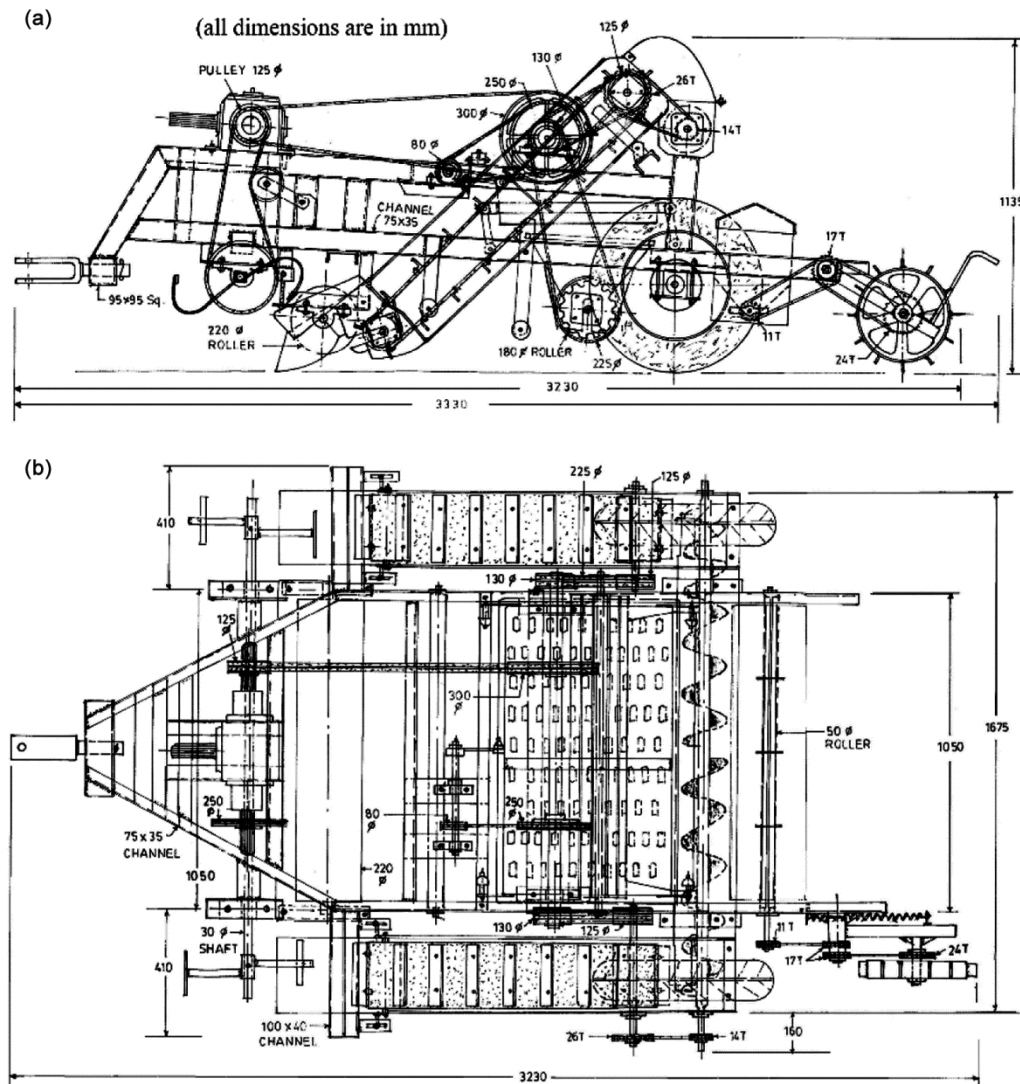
Drawing (2D) views of the developed machine (a) side view, and (b) top view
